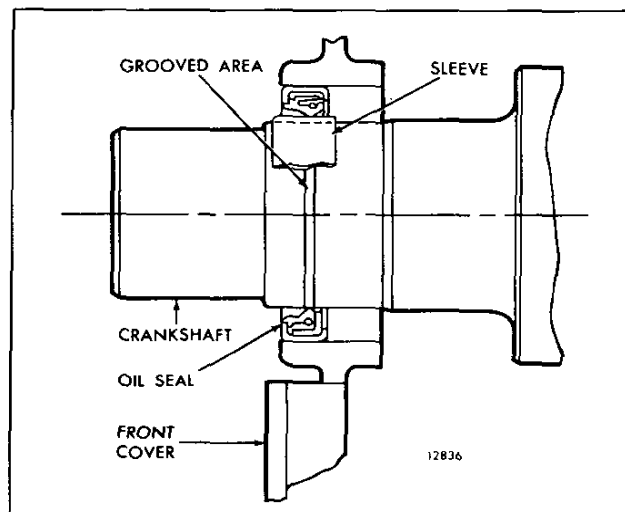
Use of Front Oil Seal Sleeve on Grooved Crankshaft
